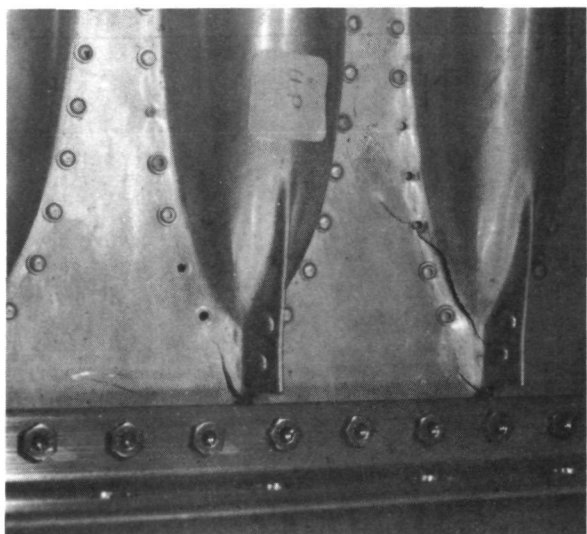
CIRCULAR TUBE AFTER SHEAR LOAD INDUCED FAILURE
